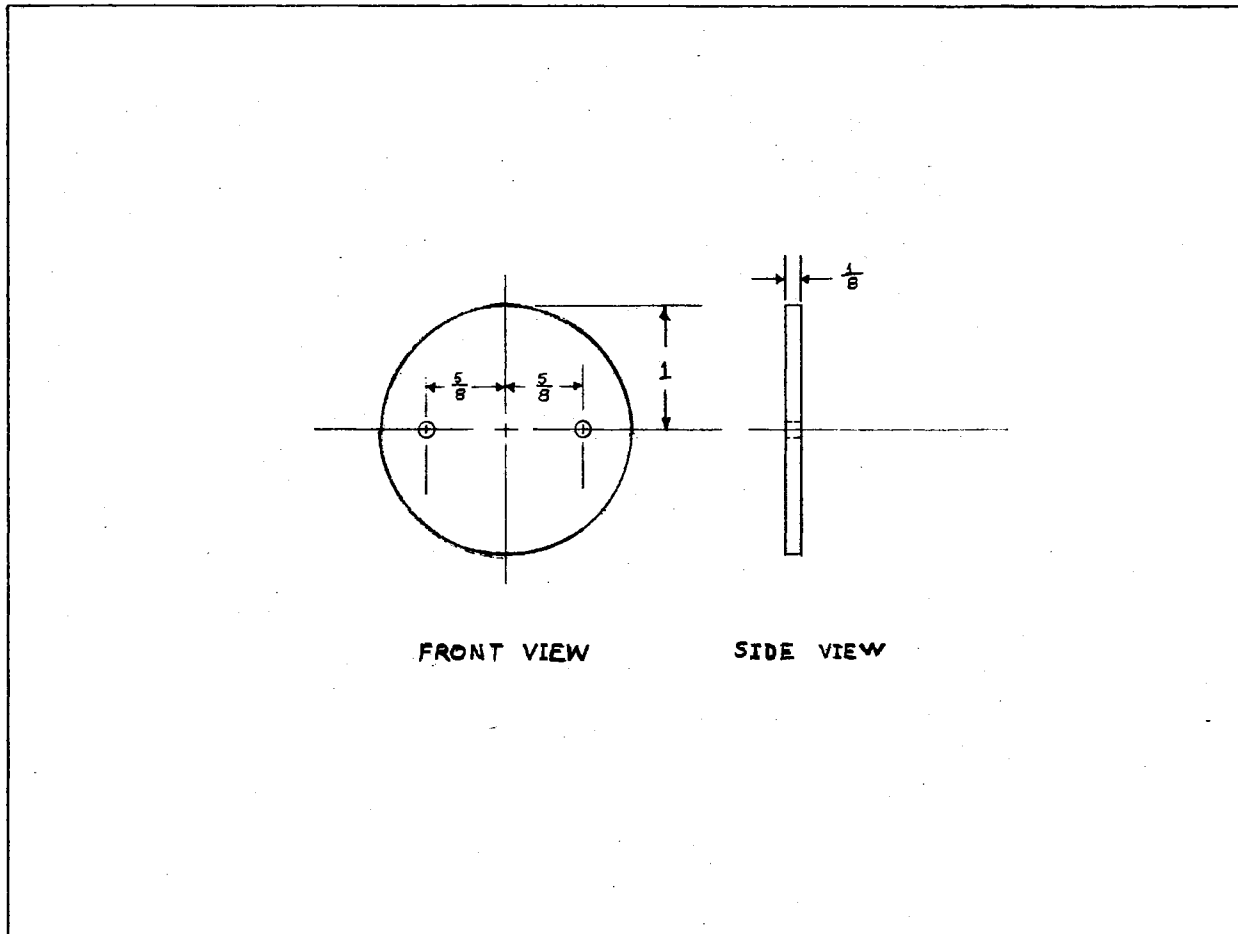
Detailed Dimensioned Drawing of the Front and Side View of the Copper Disk
